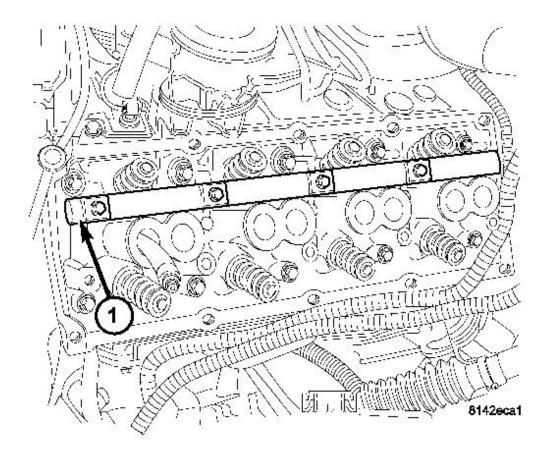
Rocker Arm Shaft 9065 Courtesy of CHRYSLER LLC
